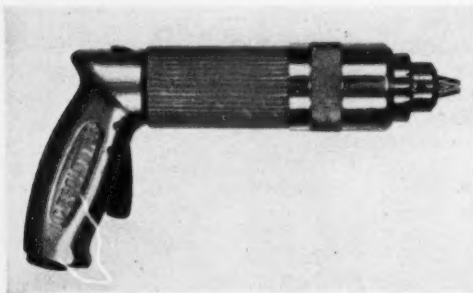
Desoutter Mighty Atom Type MA 1 Pneumatic Drill
